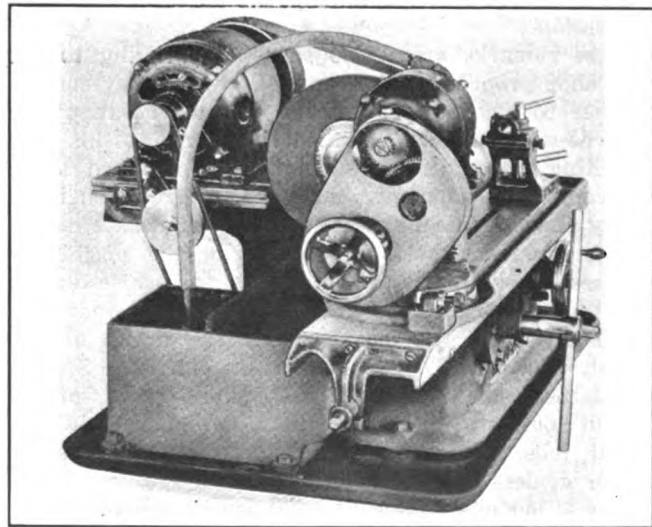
WORK HEAD END OF RE-LI-O NO. 2 WET GRINDING MACHINE
